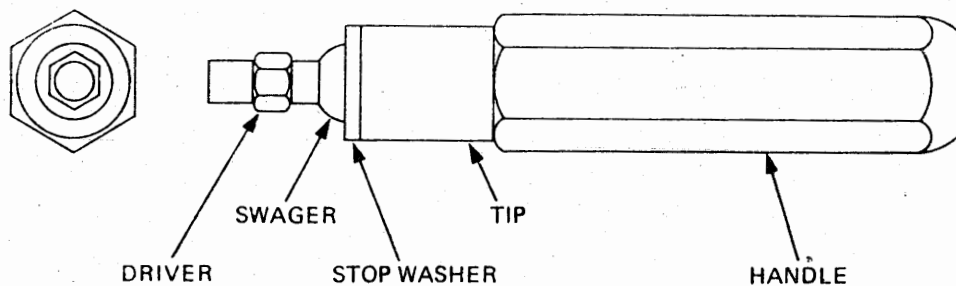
TYPICAL INSERTION TOOL (SWAGED INSERTS)
